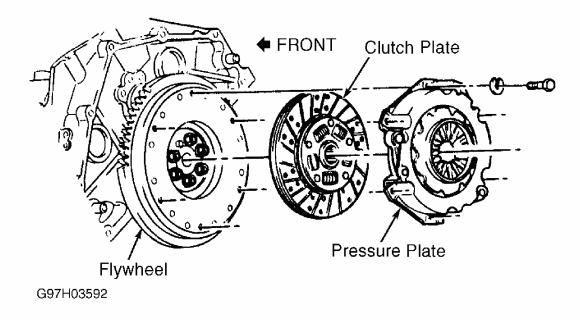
Exploded View Of Clutch Assembly Courtesy of GENERAL MOTORS CORP.
